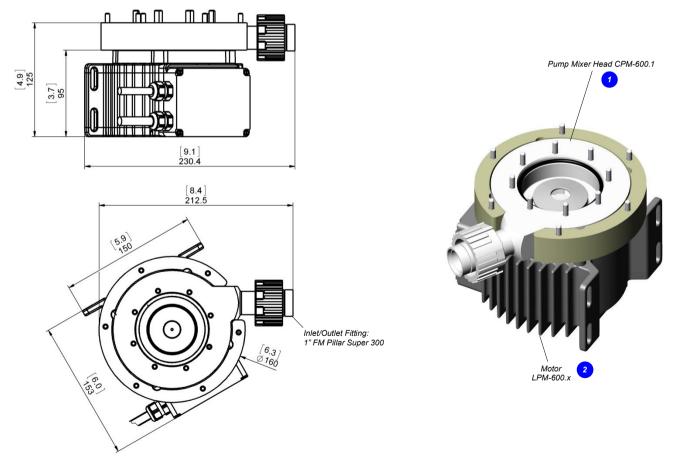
Basic dimensions of motor LPM-600 with pump mixer head CPM-600.1
